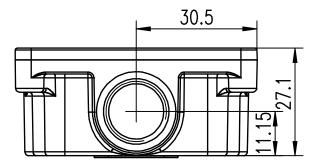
ETKS_C3 Side View with PG9 thread
